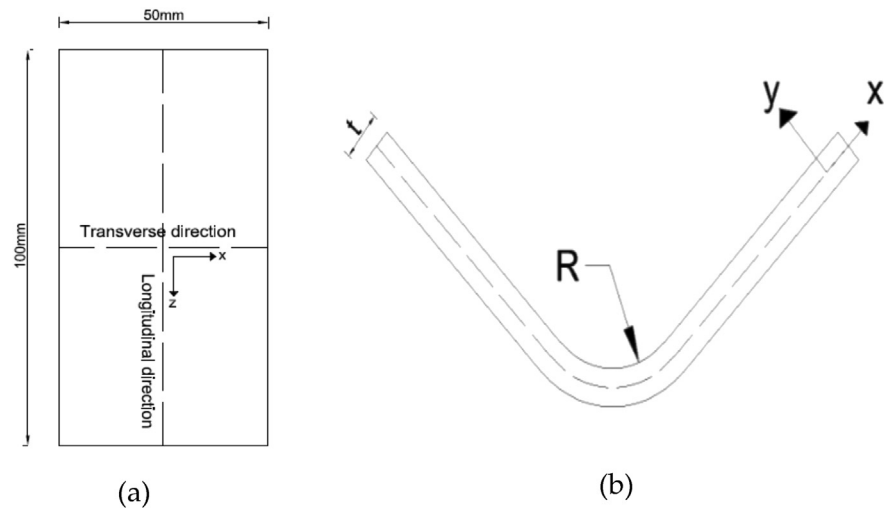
Dimensions and coordinate system of the plate: (a) plan view before bending and (b) elevation view after bending(web-flange corner).
